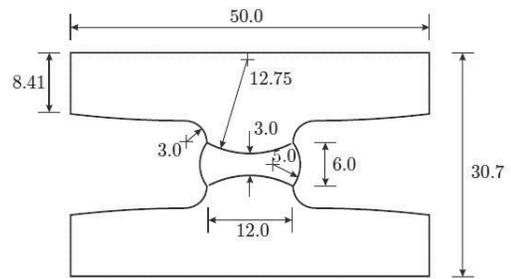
Major dimensions of the butterfly specimen (unit: mm)
